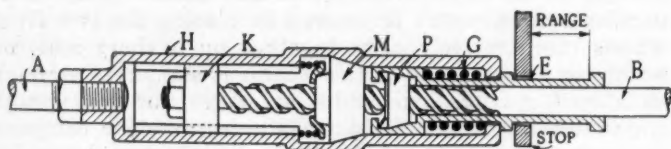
Sectional view of A. L. M. automatic brake take-up
